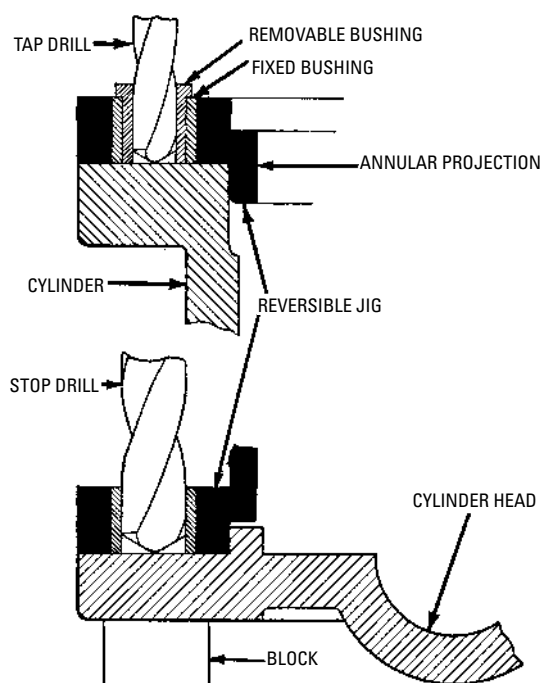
A clamp jig, with the tap drill guided by a bushing, designed for drilling holes in the cylinder (top); the operation for a hole for the cylinder head (bottom).
